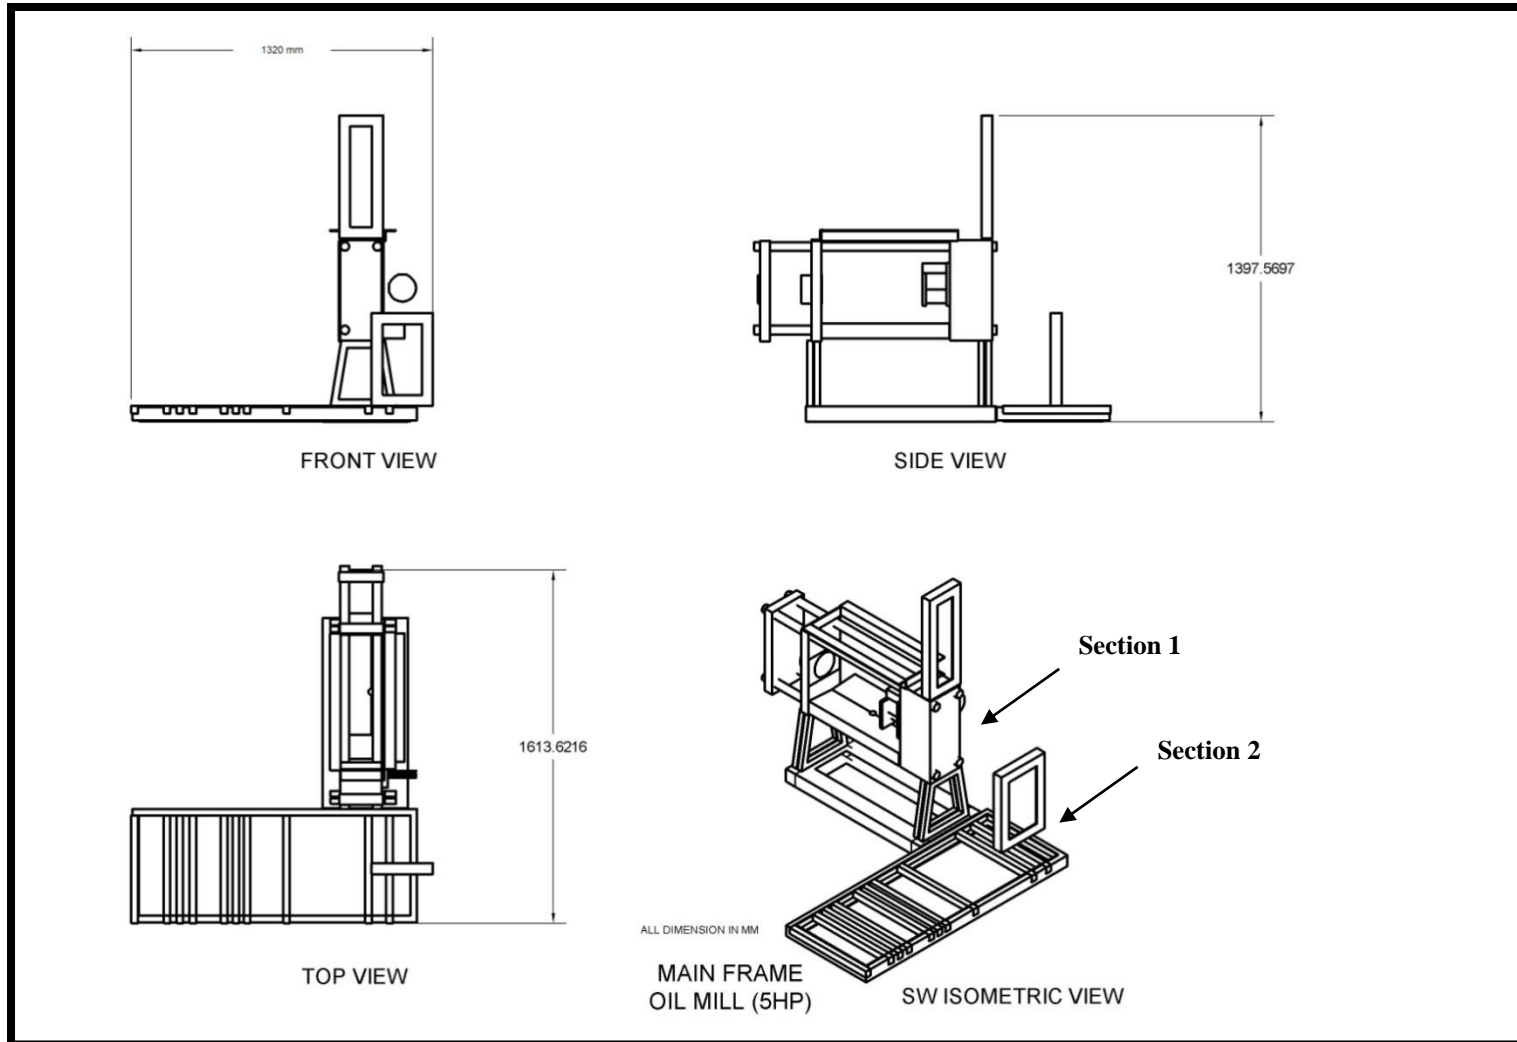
Orthographic and Isometric view of frame of mini oil mill
